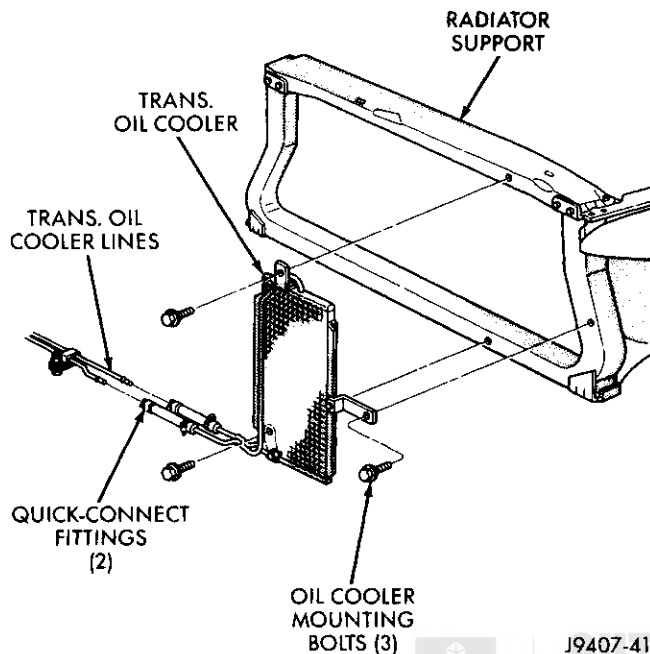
Air-To-Oil Cooler—8.0L V-10 Engine
